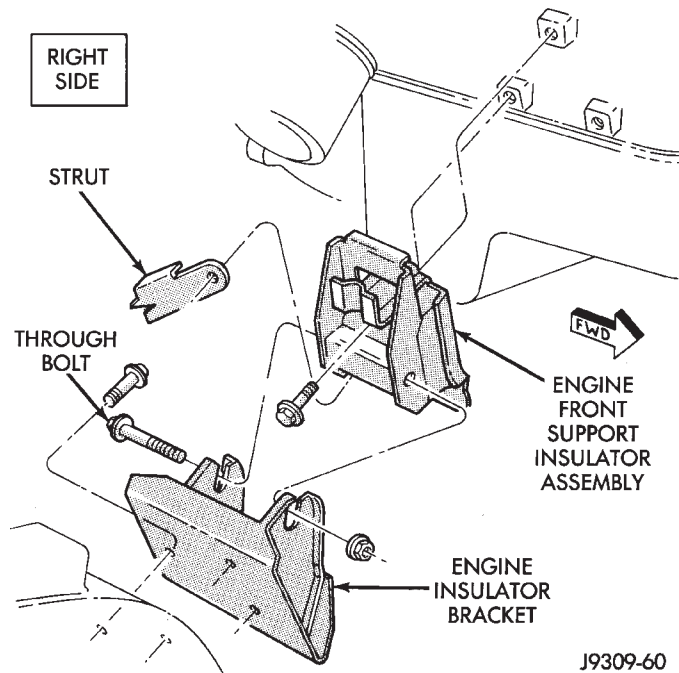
Engine Right Front Insulator Mount—2WD Vehicles
